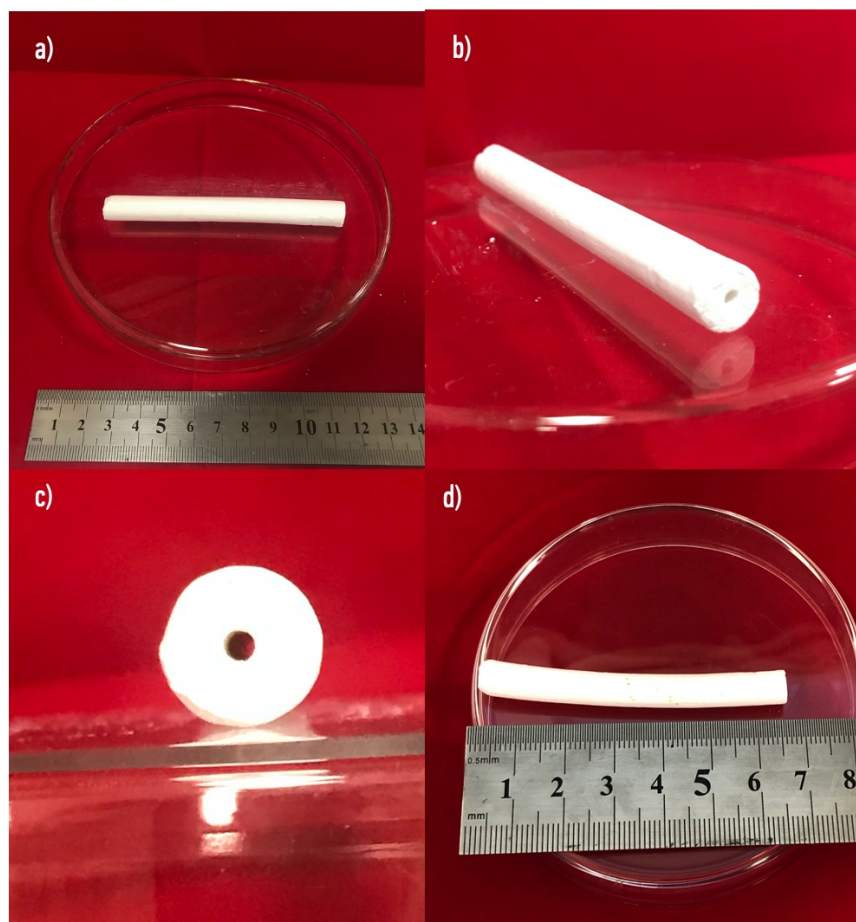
The drilled rod in dry green body state a lath machine with a pin of 2 mm diameter size and 16 cm length a) Top view of the dry body b) and c) cross-sectional view showing the hole size and dimensional stability d) the sintered rod showing shrinkage and slight deflection
